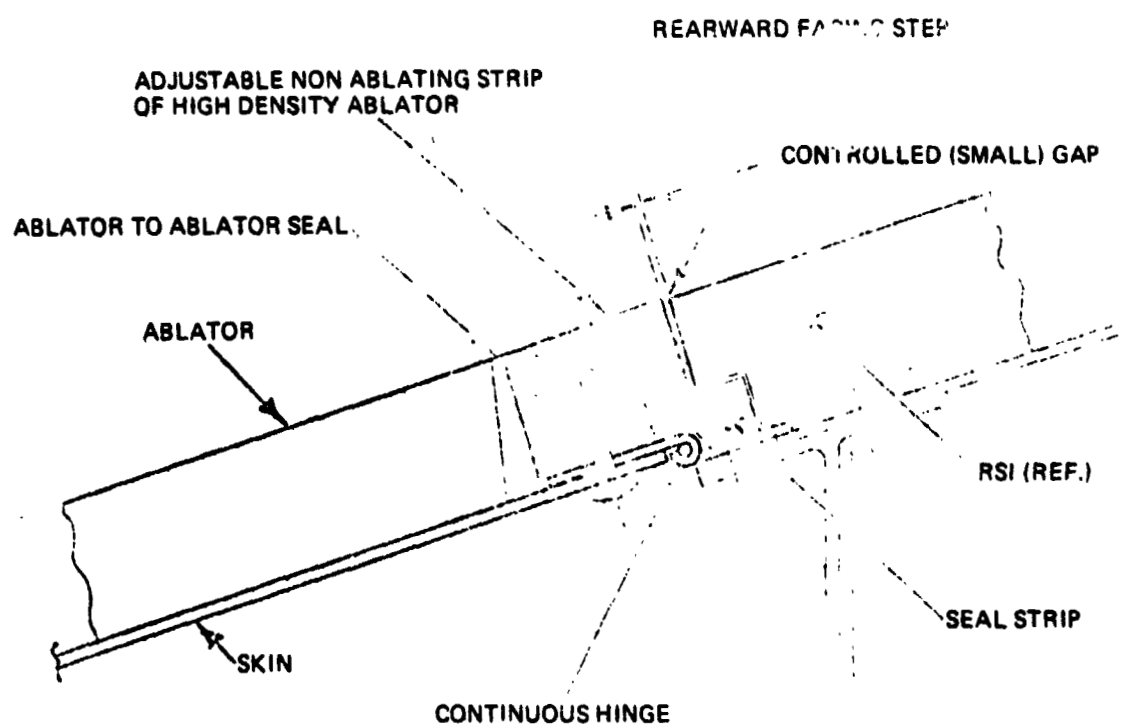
Ablator/RSI Joint: Controlled Gap with a Mechanically Attached Ablator Strip
